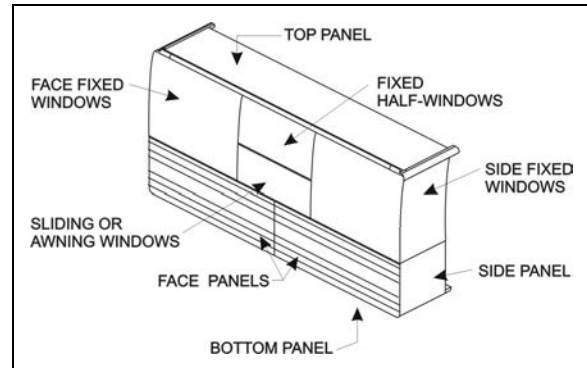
SLIDE-OUT PANELS AND WINDOWS
